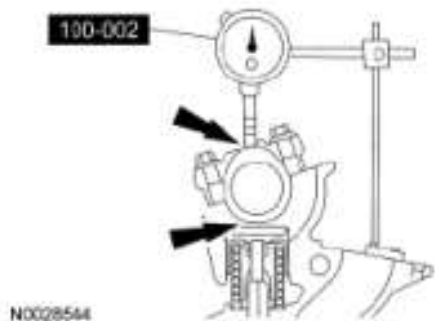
Lifting Of Crankshaft Lobe - Typical Engine With Valve Tappets
